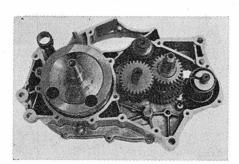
View of right half of crankcase with crankshaft and transmission cor-rectly positioned for reassembly.
